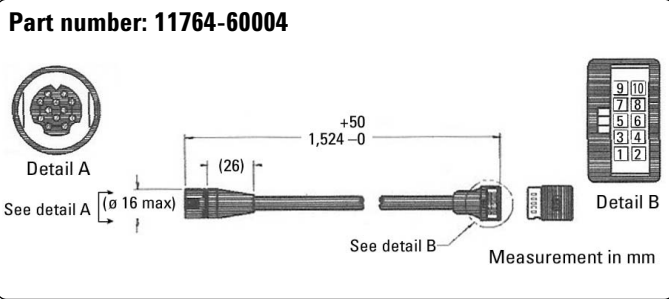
11764-60004 Viking connector to 10-pin DIP plug
